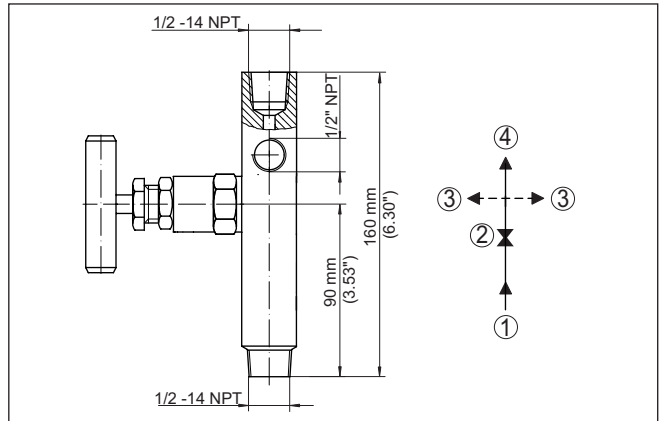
Configuration blocking valve 1-fold 1/2 NPT
